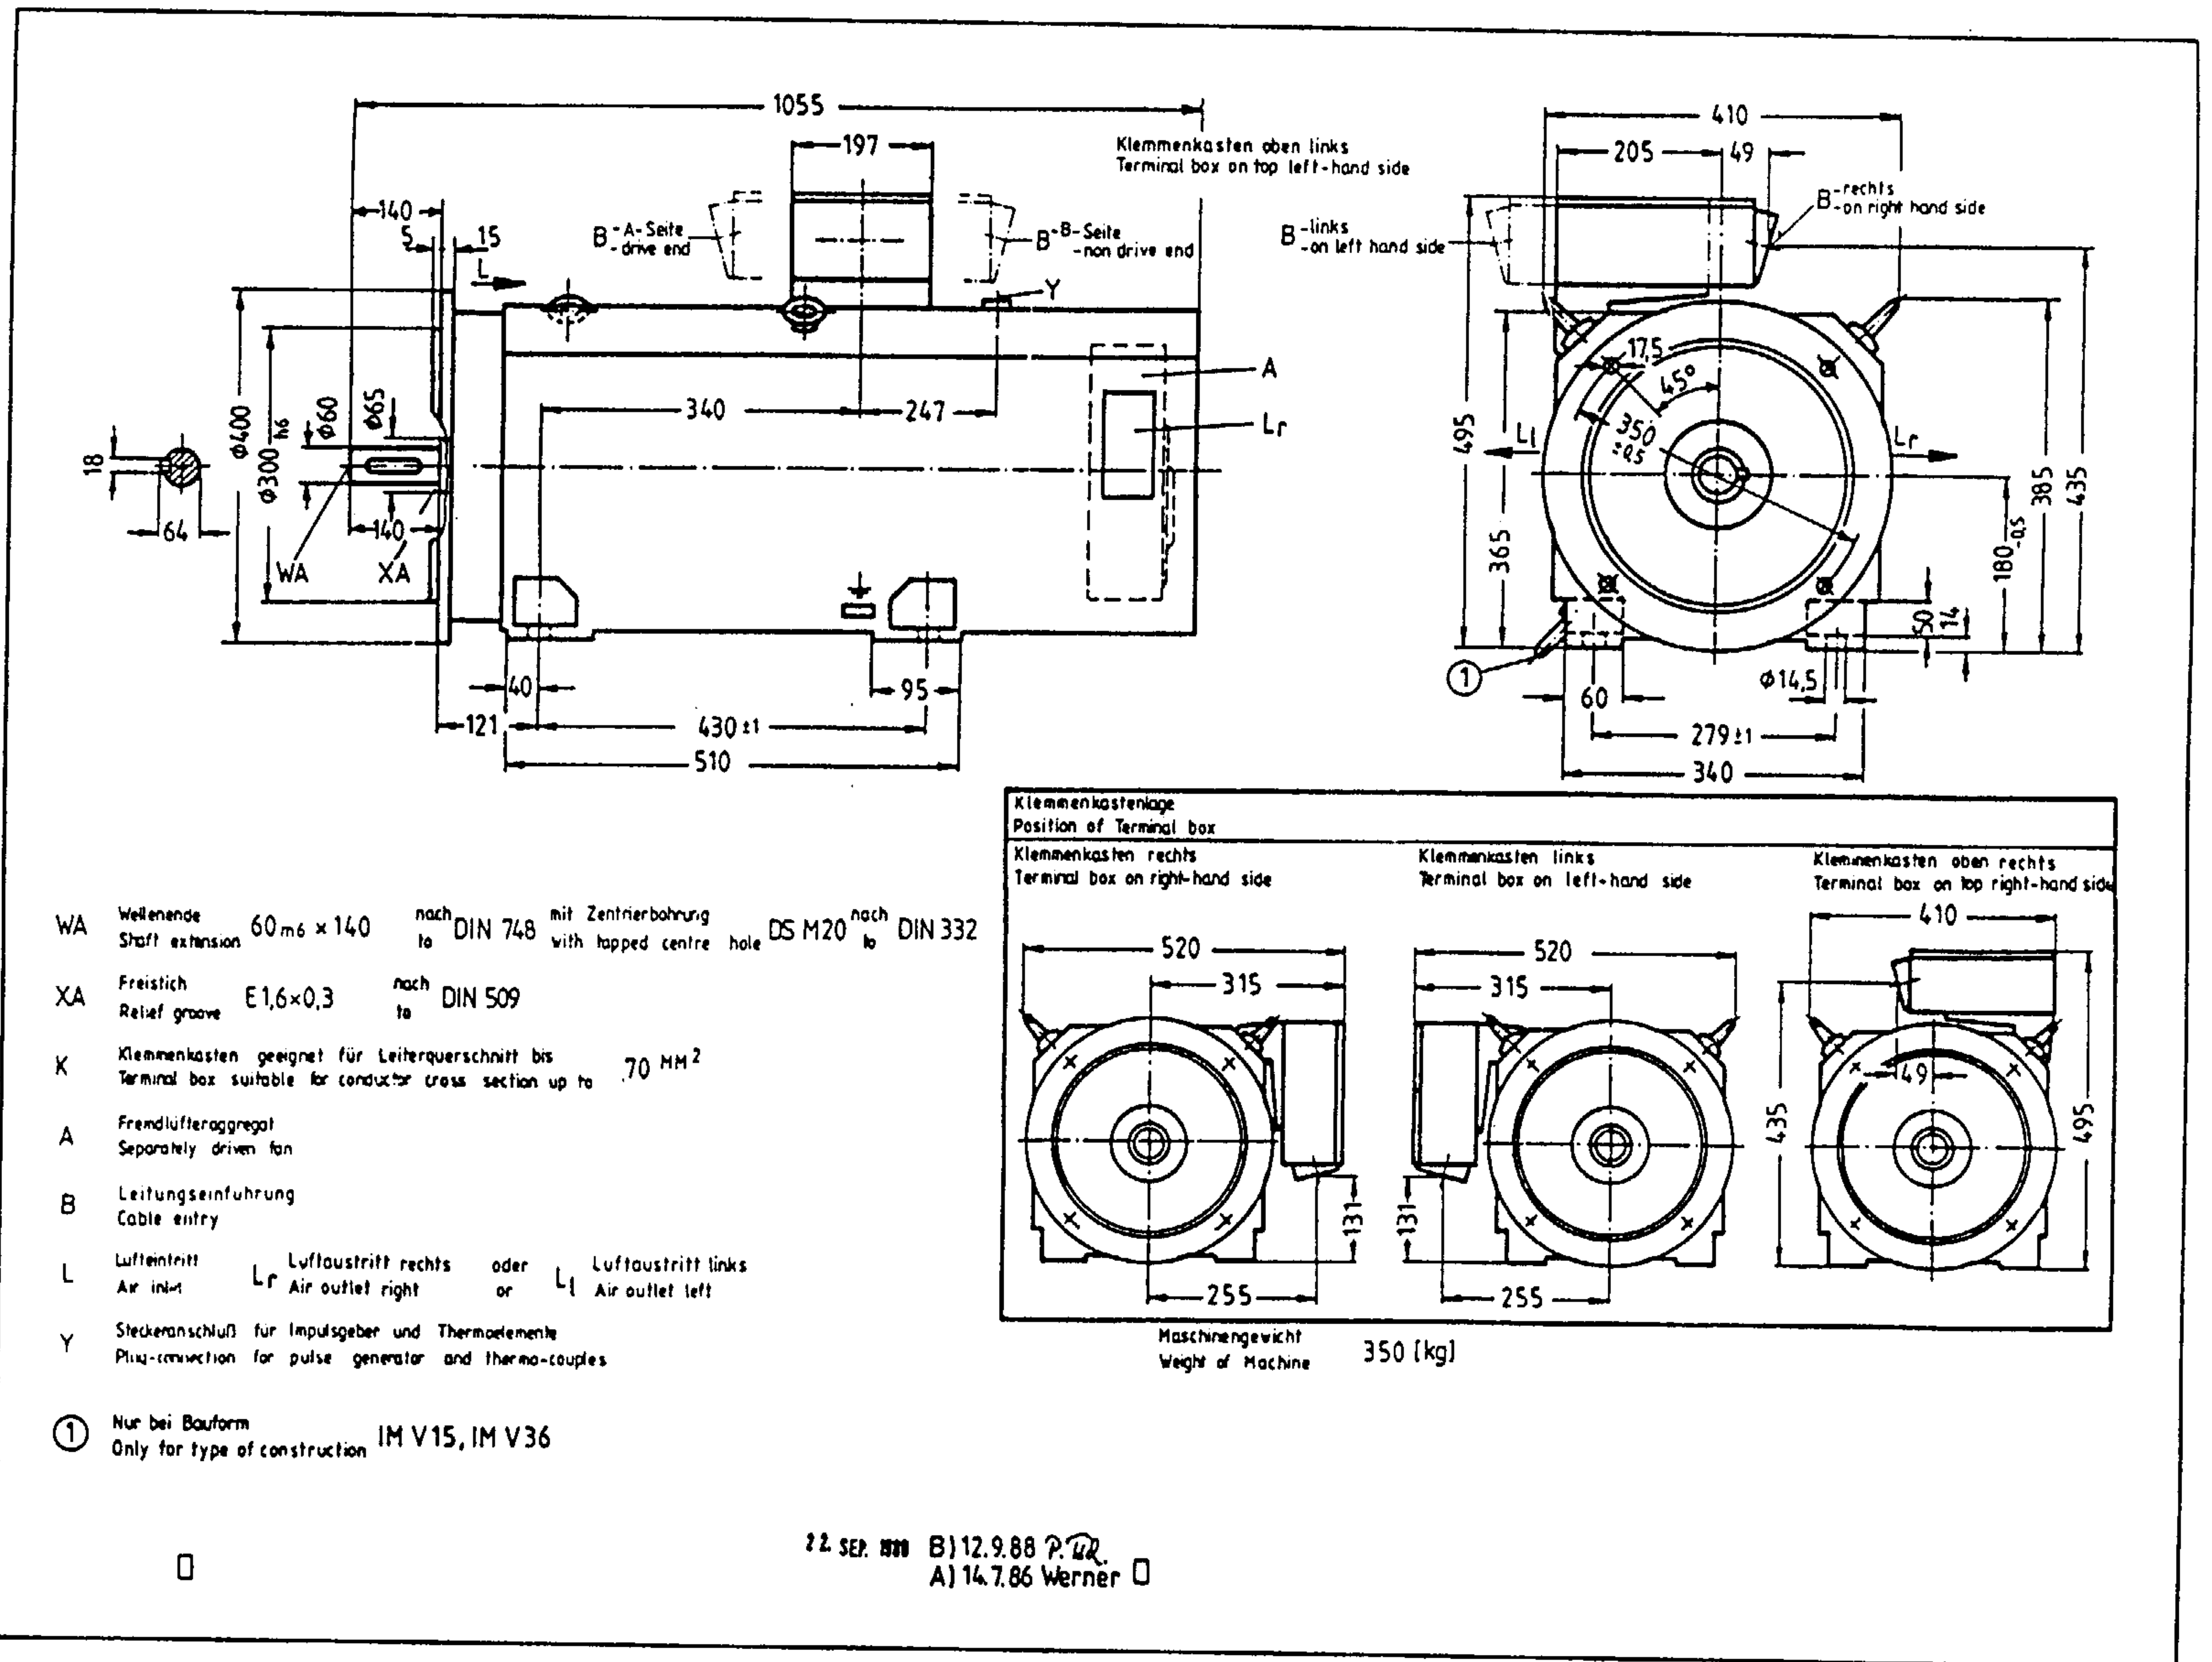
Dimension sheet for 1PH6 186-4C AC motors, type of construction IM B3 (dimensions in mm, not to scale)
